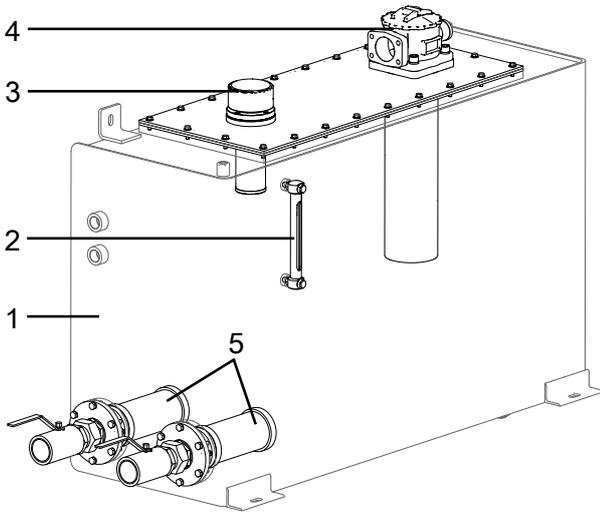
Schematic Diagram, Hydraulic Tank Structure
